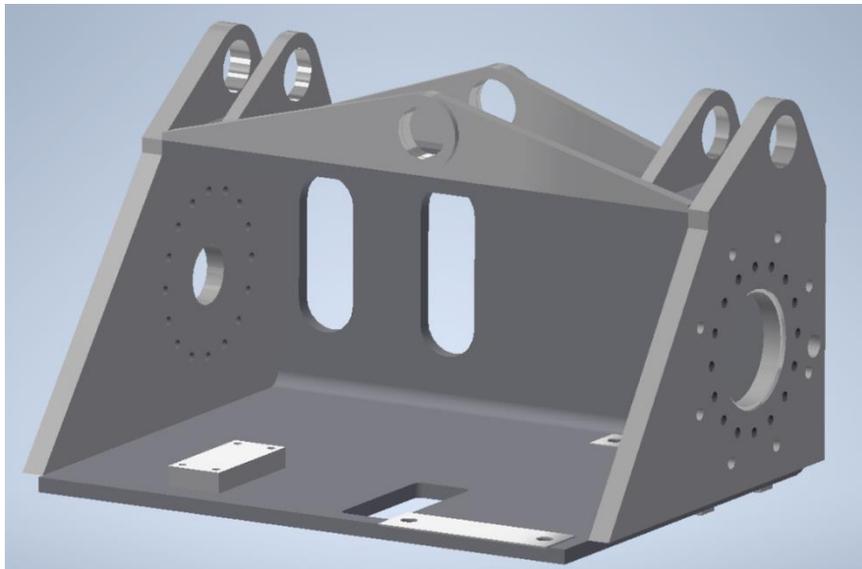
The welded center structure, machined only at the attachments for motor and gearbox. The interface to the tubes at the wheel is also machined for alignment of the two wheels and the driveshaft.
